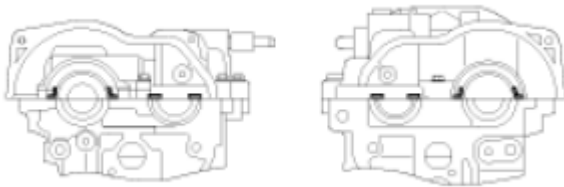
Identifying Liquid Gasket On Camshaft Cap And Packing Part
